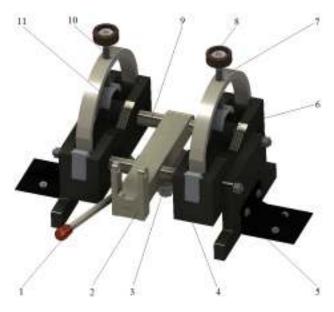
Thermoplastic materials butt fusion welding machine - 3D model: *1* - lever mechanism with knob; *2* - heater element support; *3* - samples positioning mechanism; *4* - sample support; *5* - supporting element; *6* - muff coupling; *7* - clamping element; *8* - clamping positioning wheel; *9* - shaft; *10* - screw; *11* - samples fastening element.
